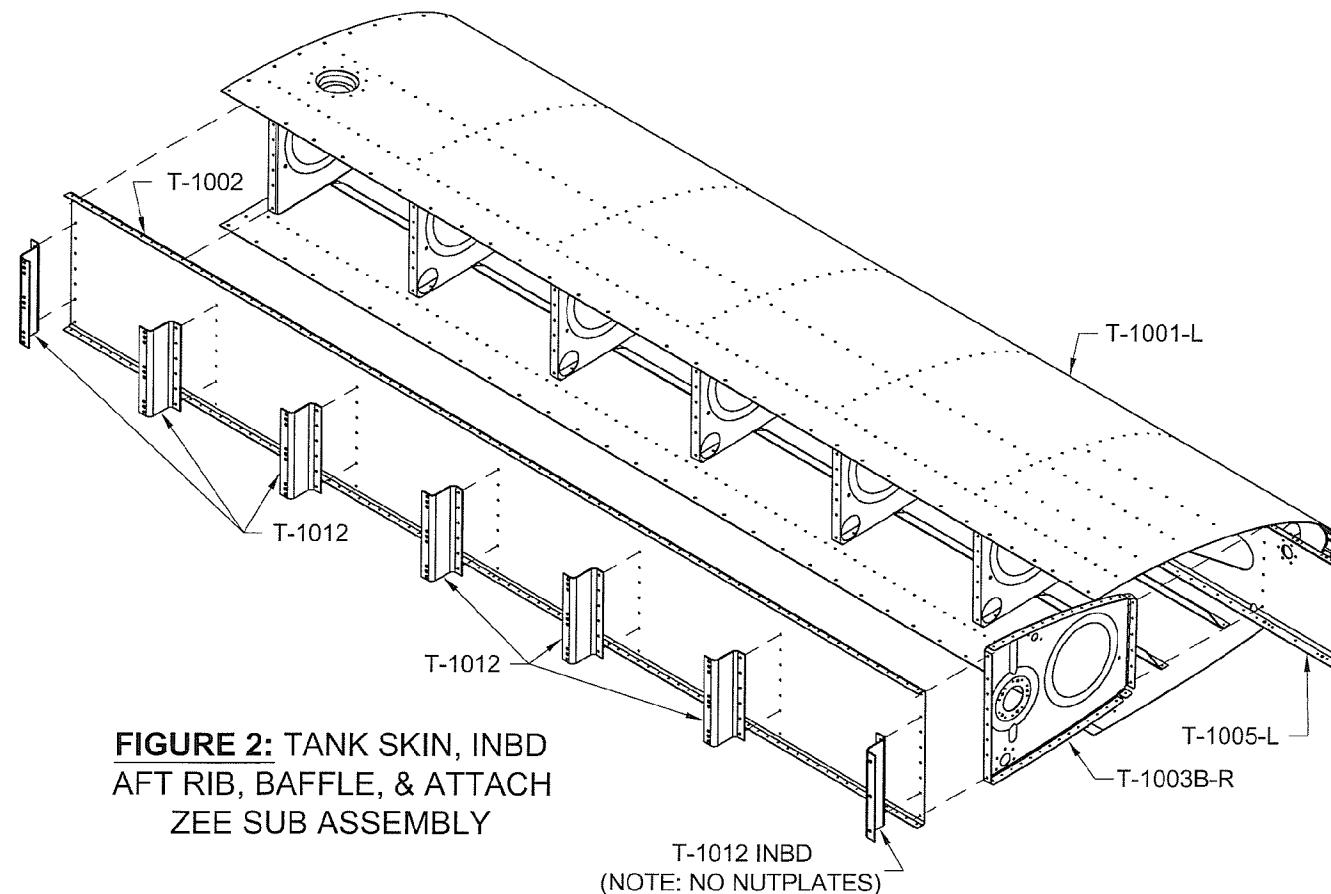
TANK SKIN, INBD AFT RIB, BAFFLE, & ATTACH ZEE SUB ASSEMBLY
